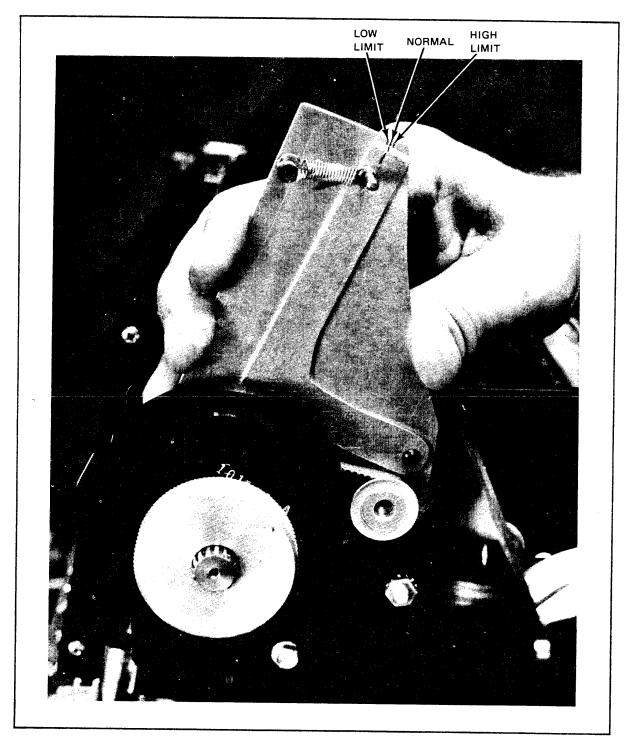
Checking Paper Feed Belt Tension, Using Tensiometer
